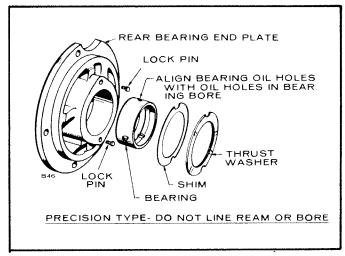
BEARINGS FOR REAR BEARING PLATE
